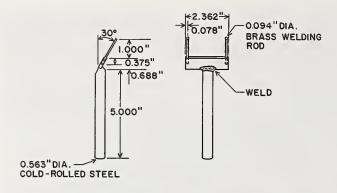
Details of guide used for holding bandoleer strip steady while excess plastic is being trimmed off.
